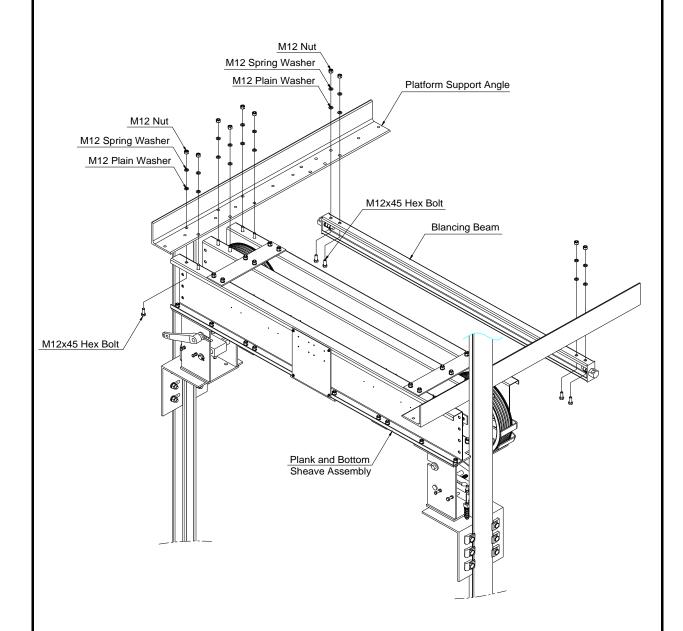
B. PLATFORM SUPPORT ANGLE and BLANCING BEAM INSTALLATION (Underslung Fork type)
